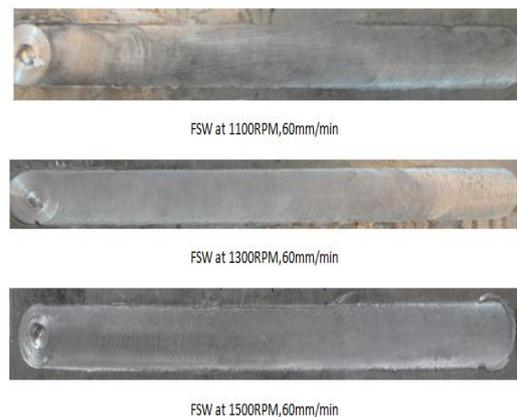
The appearance of upper surface of welding beads of 6061-T6AA plates produced by FSW.
